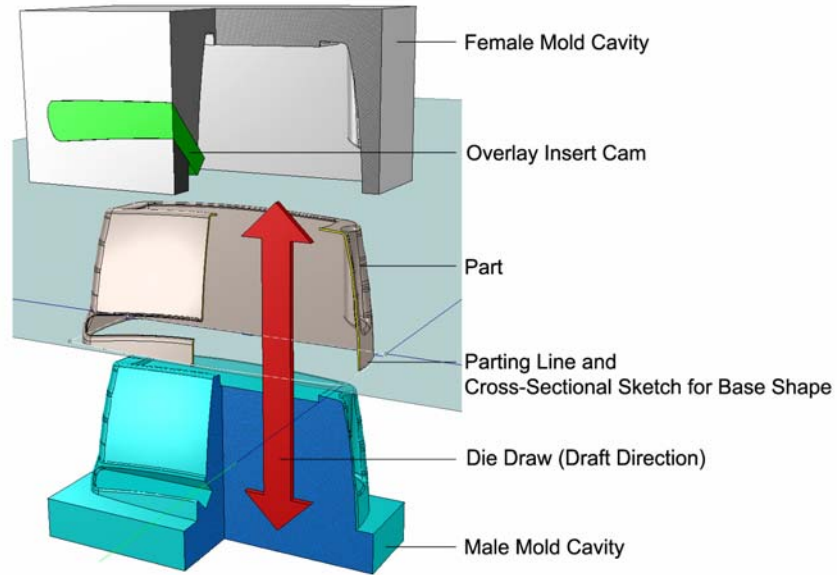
Cut-a-way Perspective of an Injection Mold and Part. Note how the part tapers or drafts as it extends into the Female Mold Cavity.
